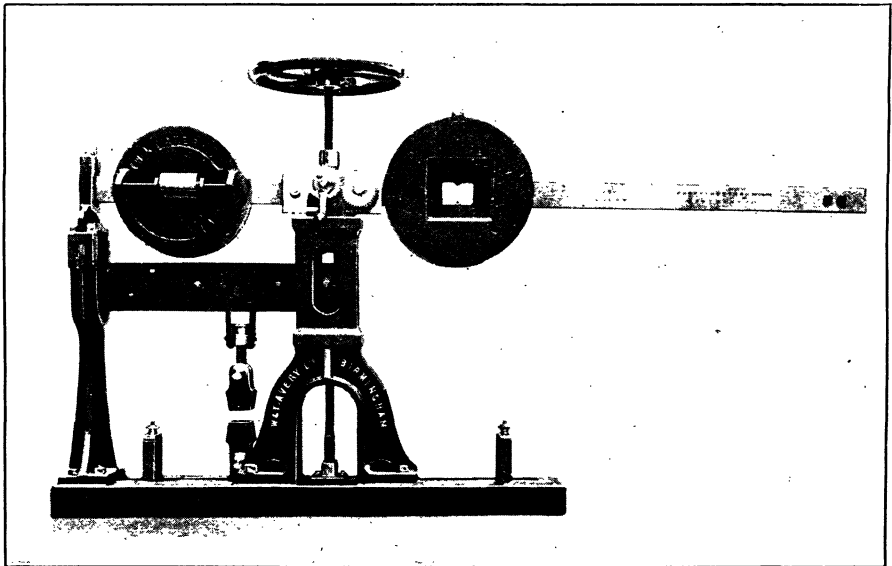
Transverse and Tensile Testing Machine for Cast-iron.
